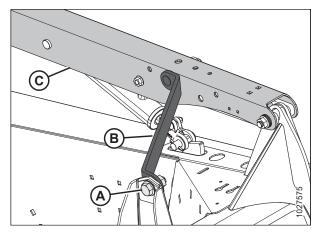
Support Arm and Brace – Single Reel Only, Right End Shown, Left End Opposite
